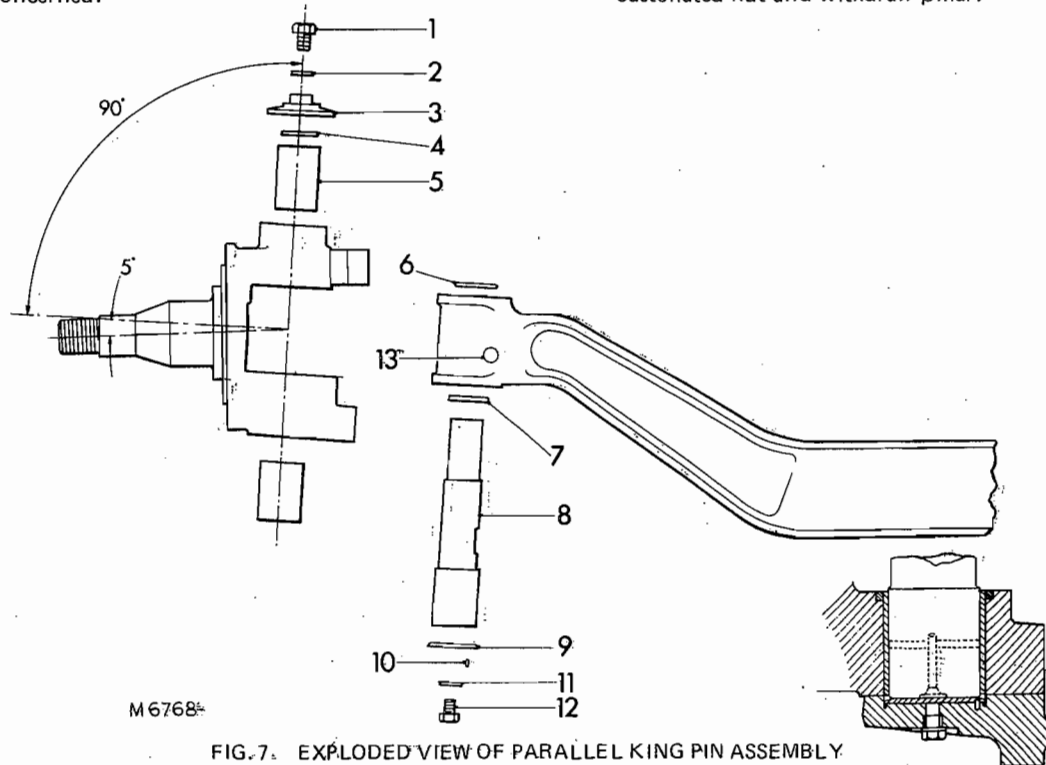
EXPLODED VIEW OF PARALLEL KING PIN ASSEMBLY
